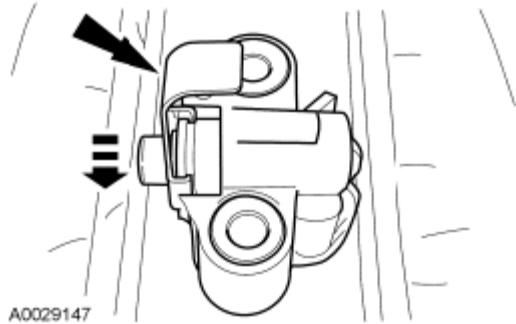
Installing Hydraulic Chain Tensioner Retaining Clip On Tensioner
